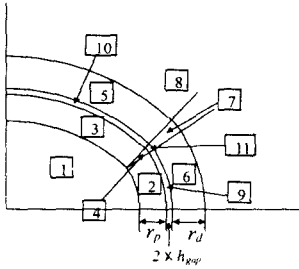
Division of sections for intermediate sliding constraint surfaces
